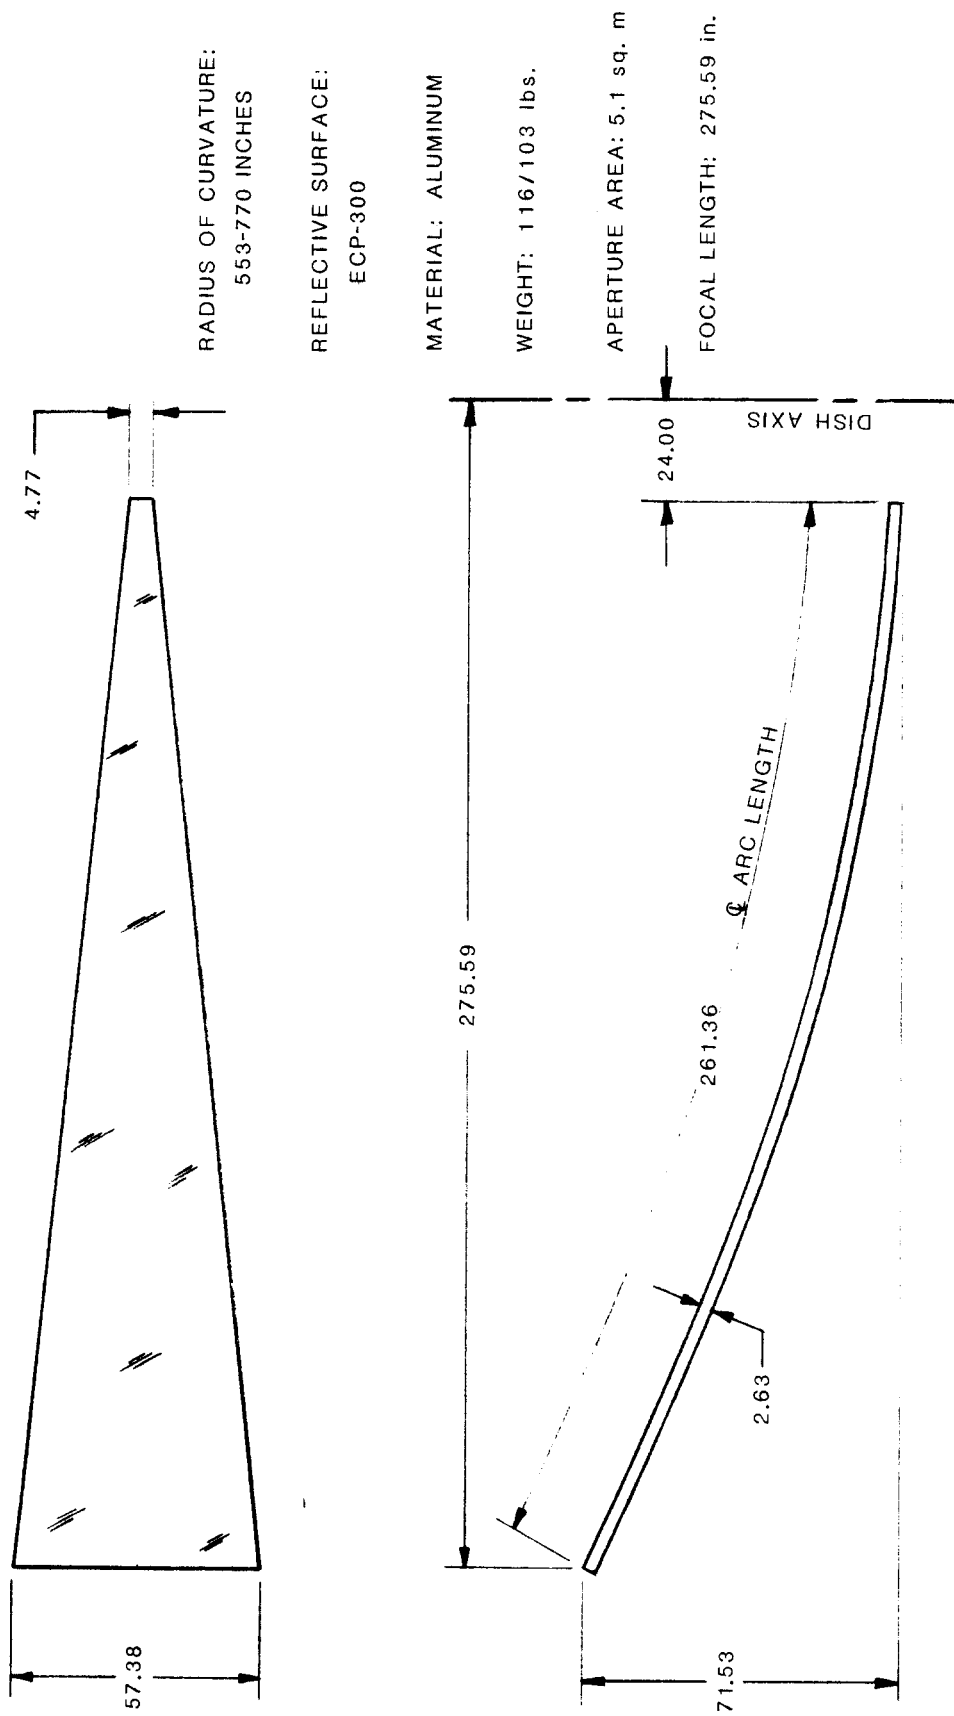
PROTOTYPE OPTICAL ASSEMBLY
